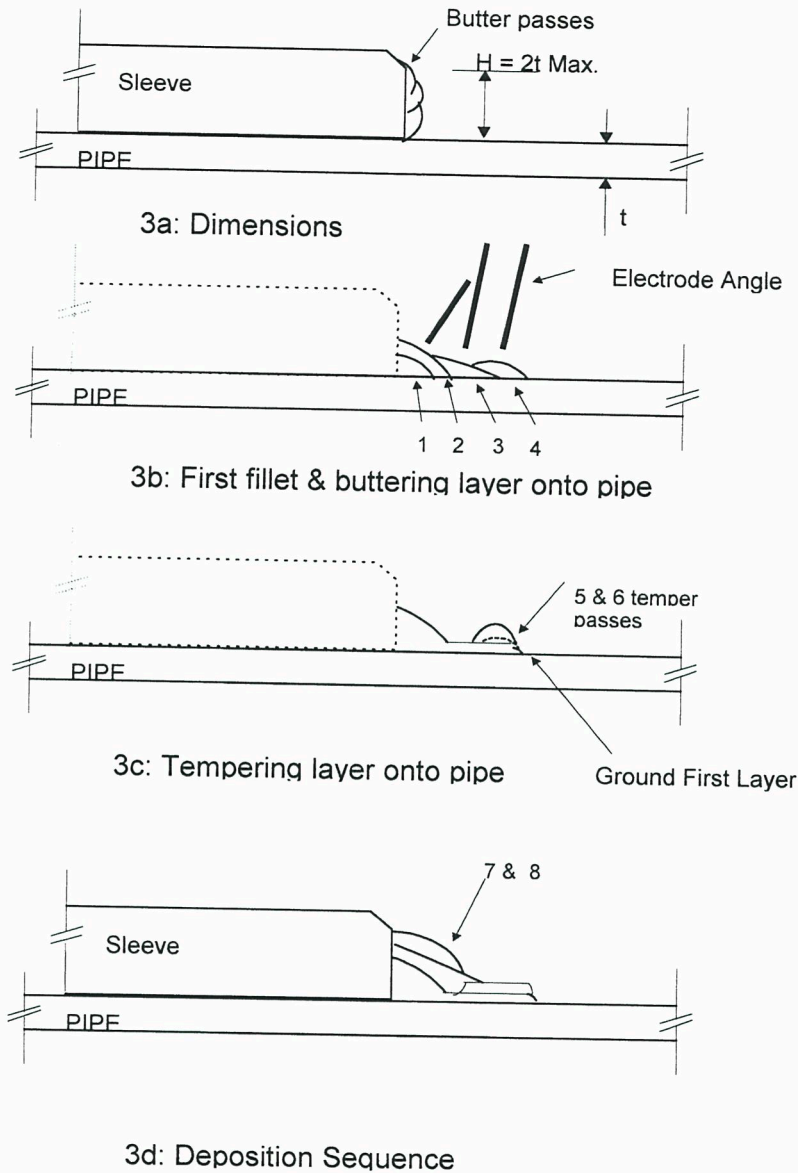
WELDING DETAIL AND SEQUENCE – SPLIT TEE / STOPPLE WELD
